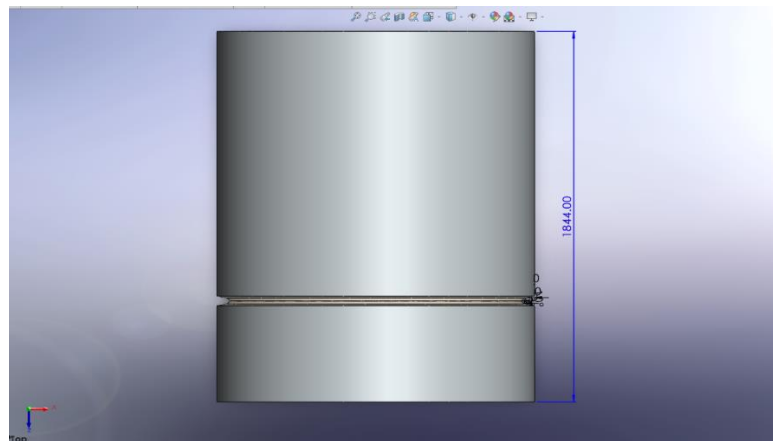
CUTTING PROFILE IN INCONEL SHELL DESIGN
